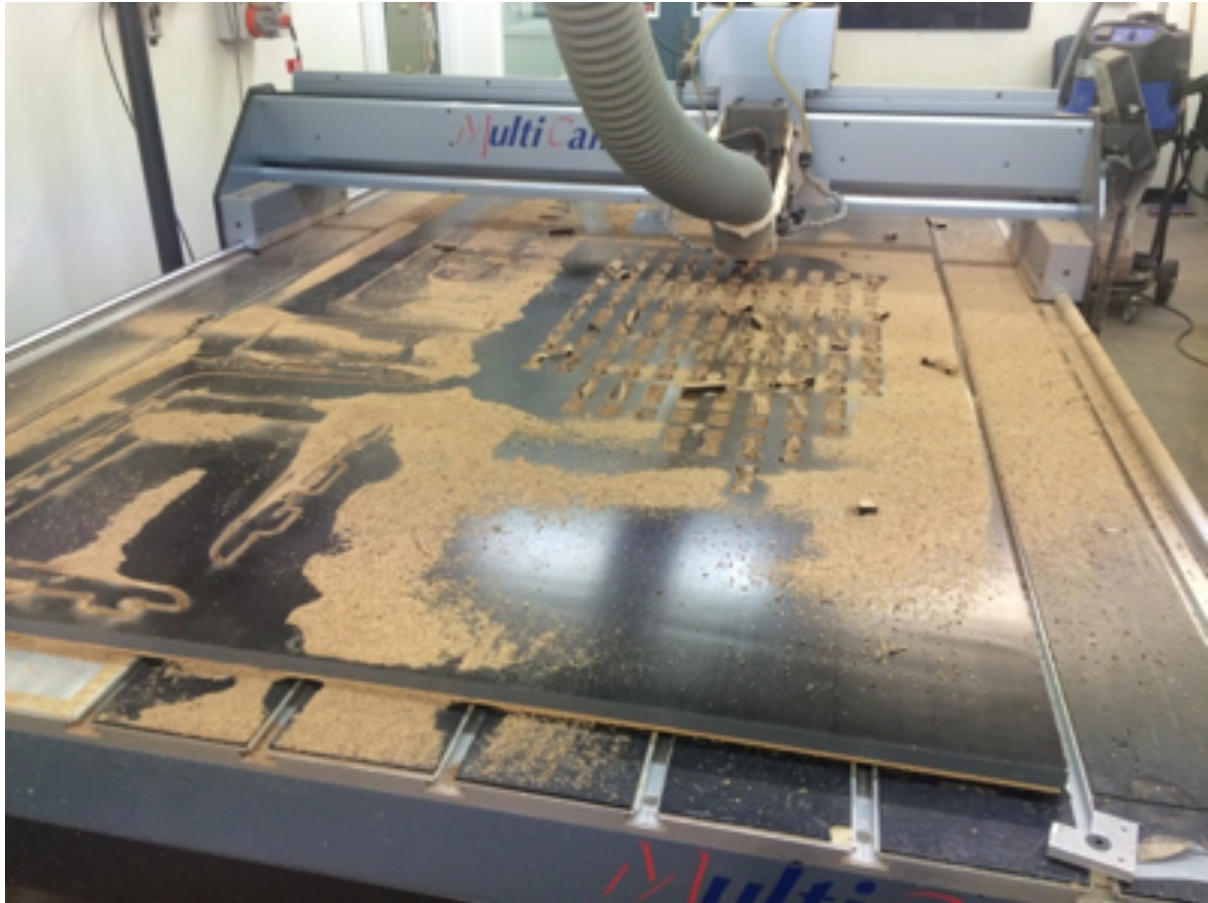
CNC machining of the InstaBooth. Photo Credits: Glenda Caldwell
